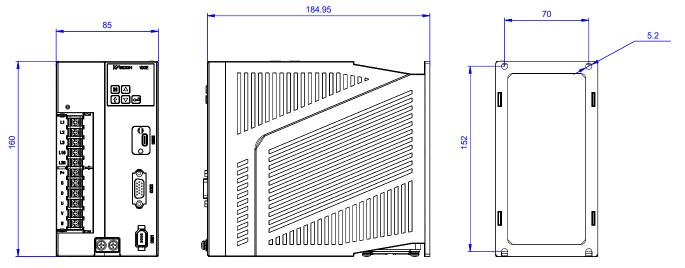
Installation Dimensions of VD3E Type B Servo drive
